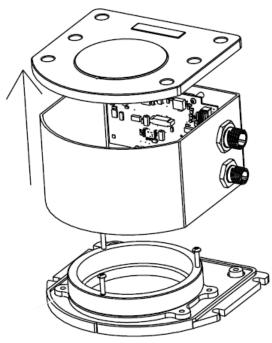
Lift Top Cover, Tube Body and 3 Ring Spacer Screws
